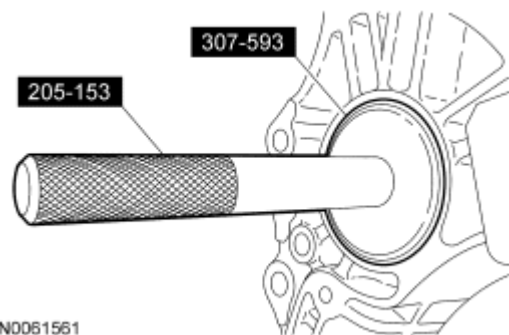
Identifying Differential Fluid Seal & Special Tools (307-593, 205-153)
